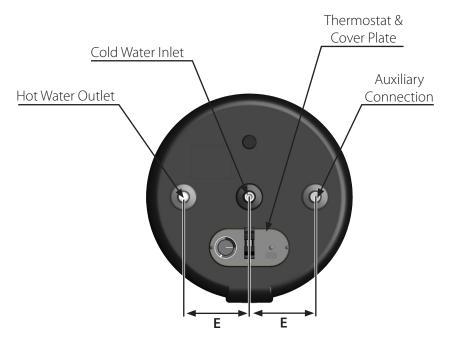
GINIUS 35-45-55-65 Dimensions
